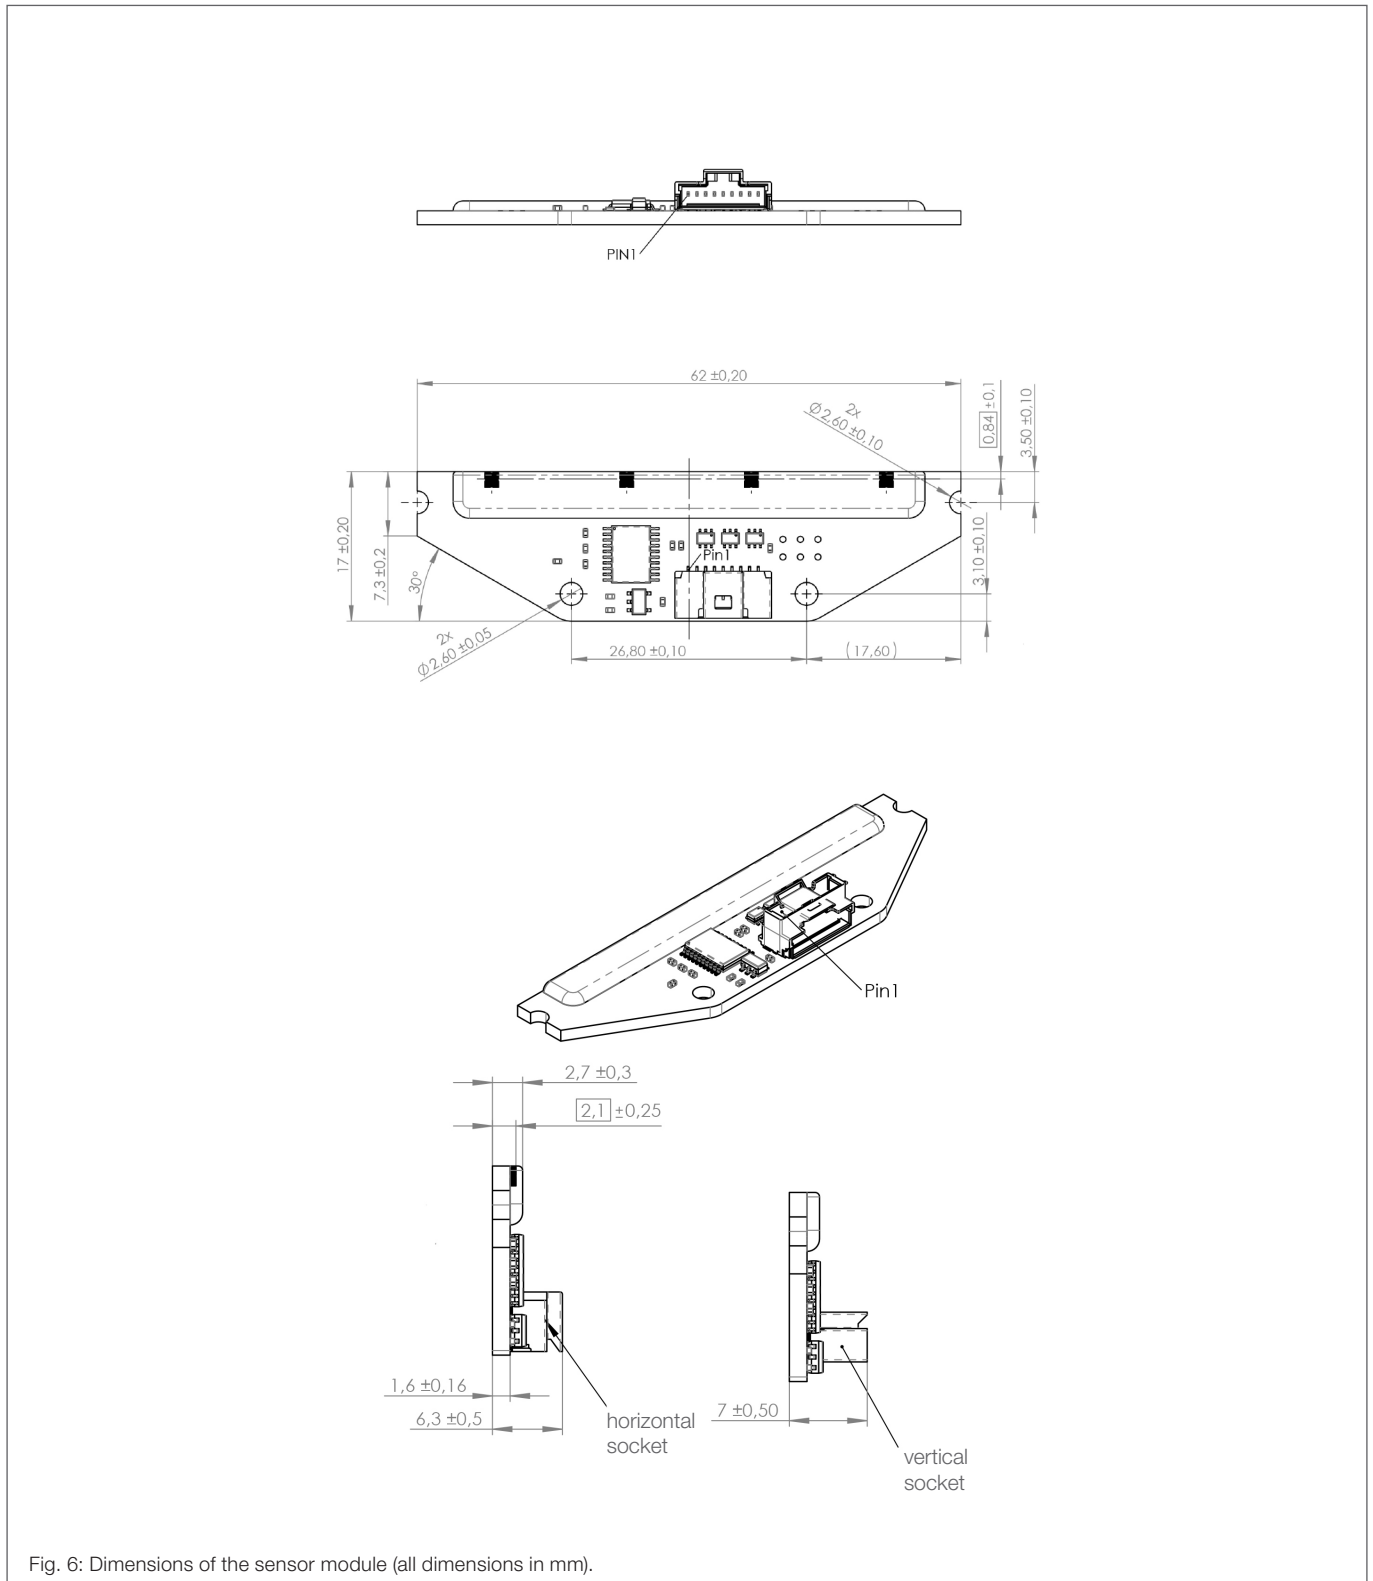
Dimensions of the sensor module (all dimensions in mm).
